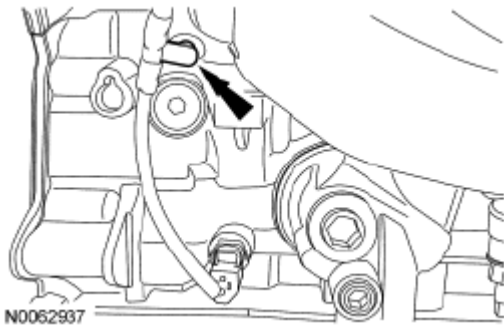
Locating Wiring Harness Pin-Type Retainer
